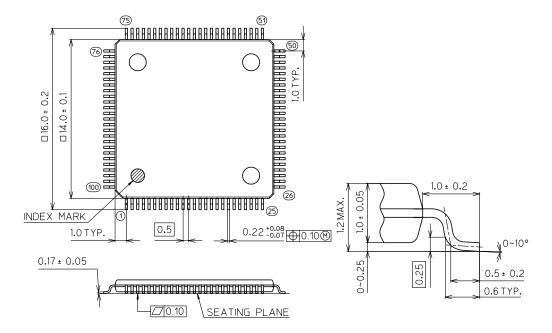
MSM6679A-110 100-Pin Package Mechanical Drawing
